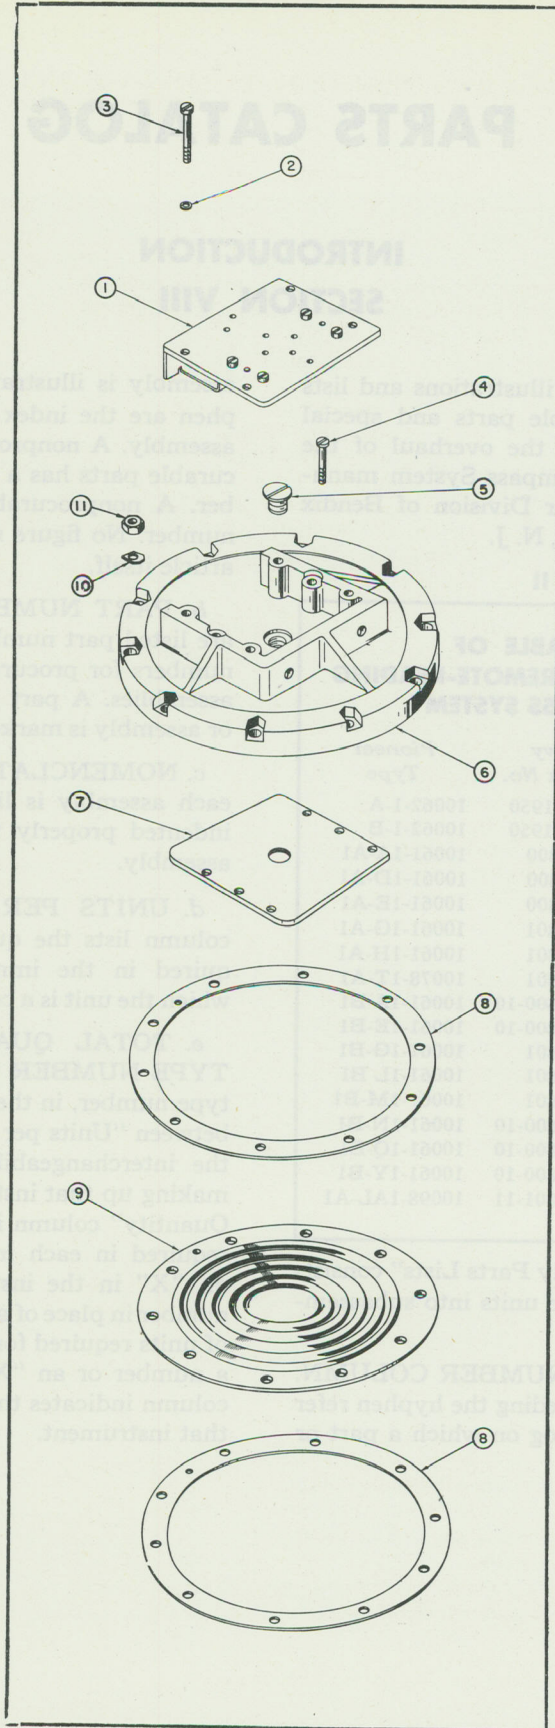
Exploded View Drawing—Main Assembly—Transmitter—Type AN 5730-3
